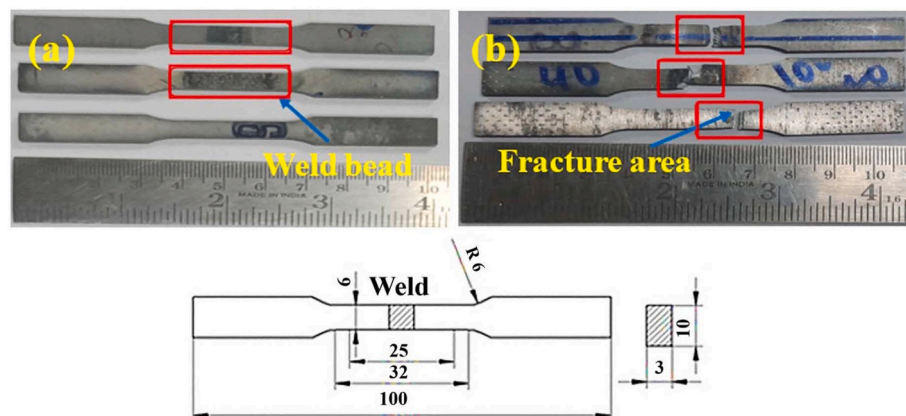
Tensile test specimen (a) before test, and (b) after test (All dimensions are in mm).
